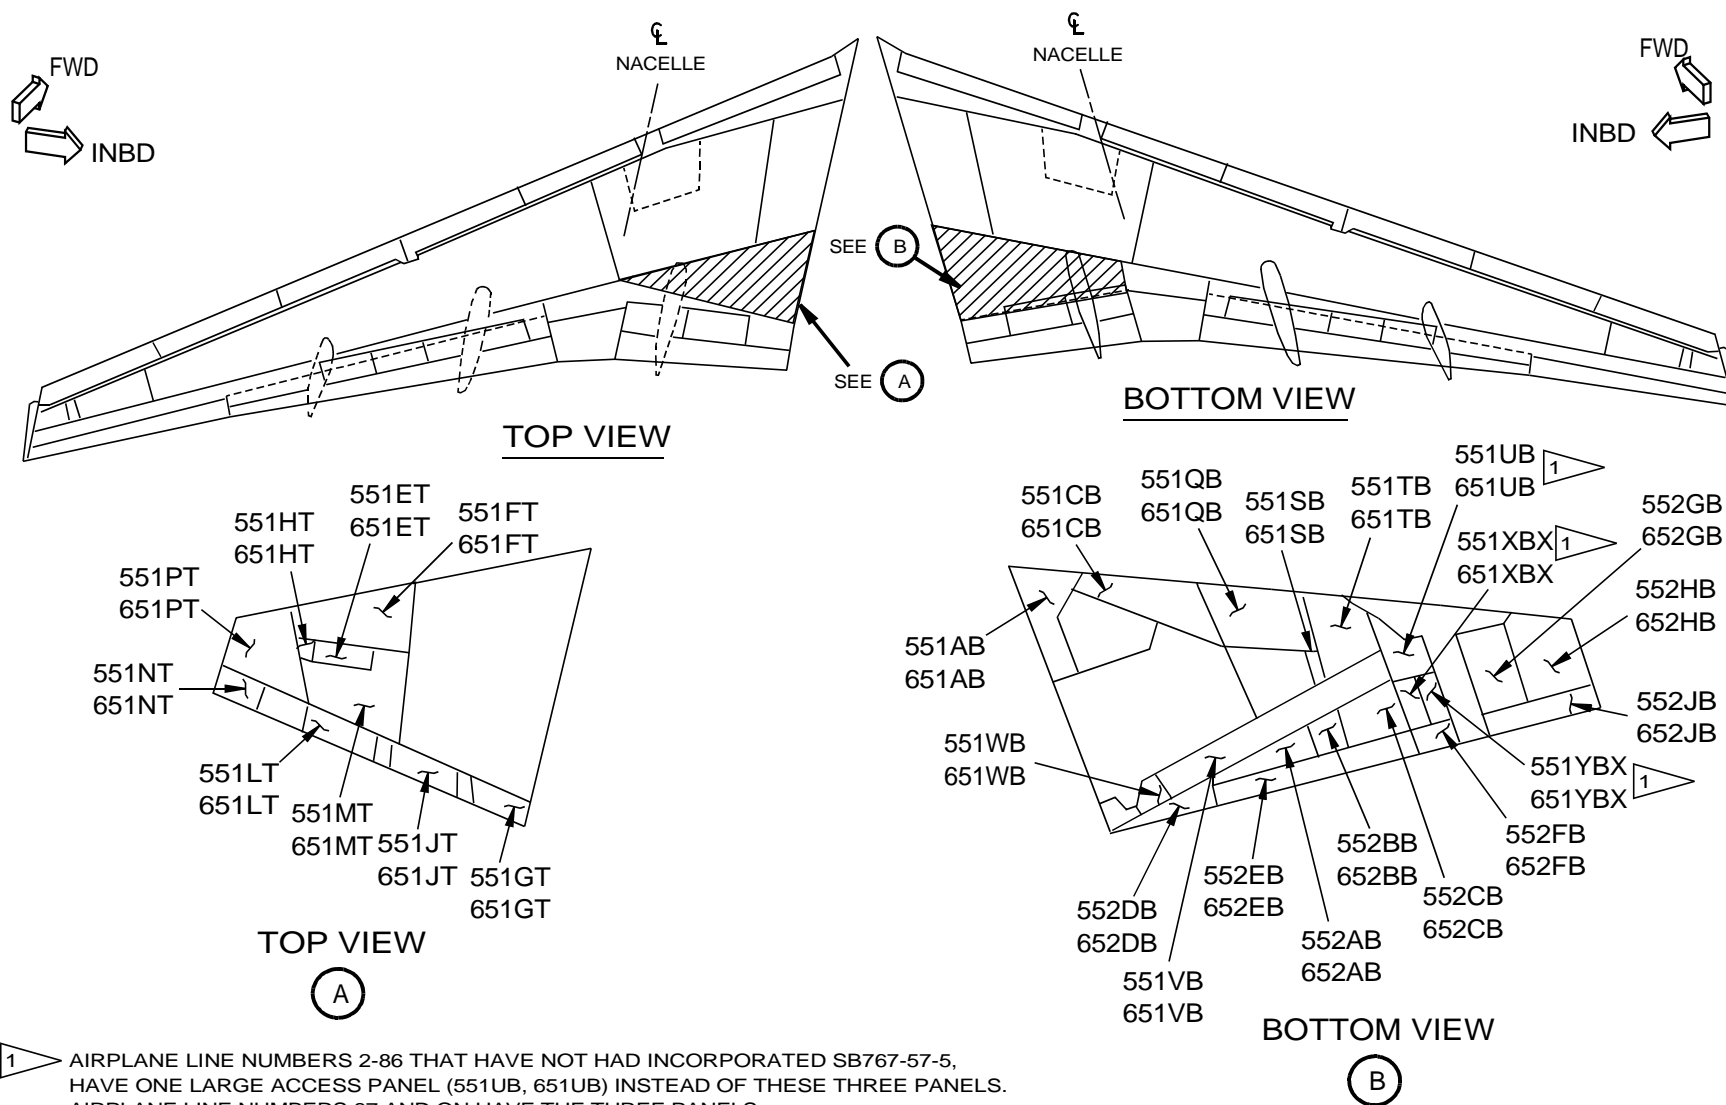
SUB-MAJOR ZONES 551/651, 552/652 - INBOARD WING TRAILING EDGE (LEFT WING SHOWN, RIGHT WING TYPICAL)
